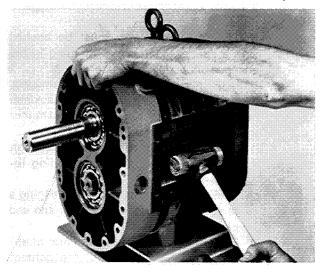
USING SOFT FACED MALLET TO LOOSEN DRIVE END PLATE
